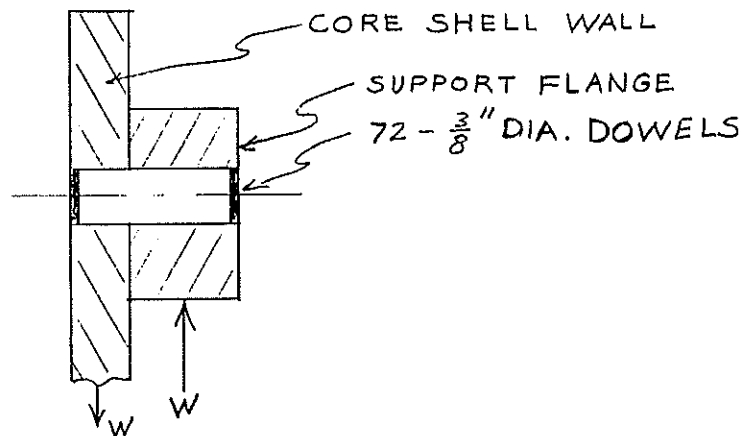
Loading on the Shell Support - Flange Attached to the Shell.
